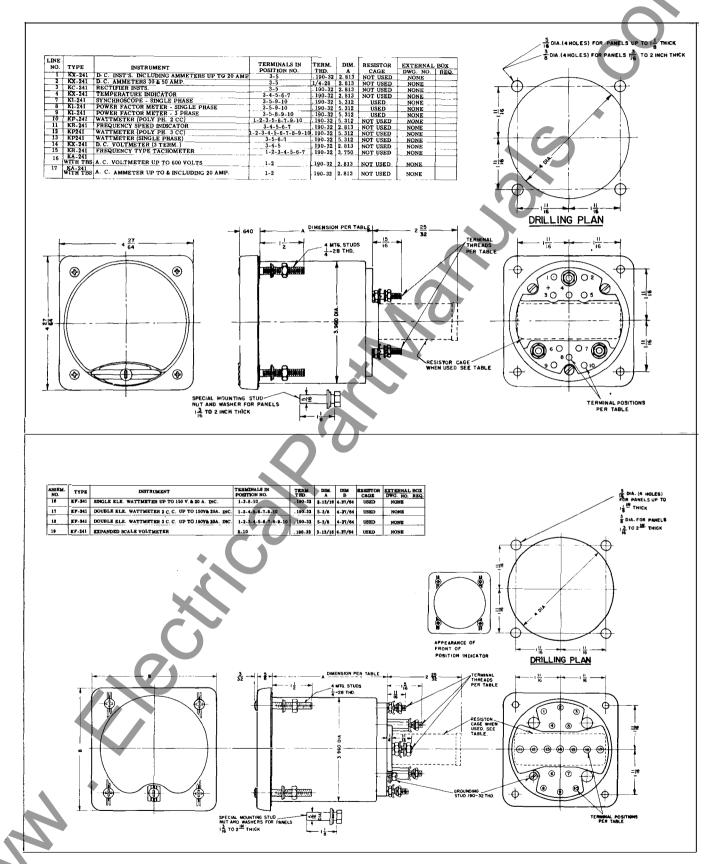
Outline Dimensions and Drilling Plan for Type K-241 Instruments.
